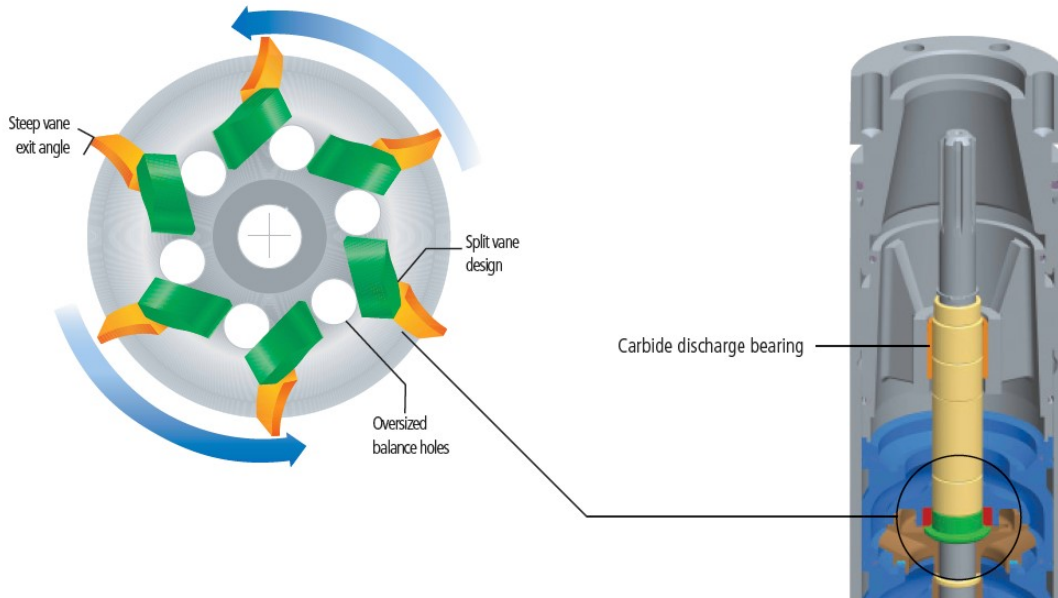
Schematic views of the MVP pump impeller (Baker Hughes 2010)
